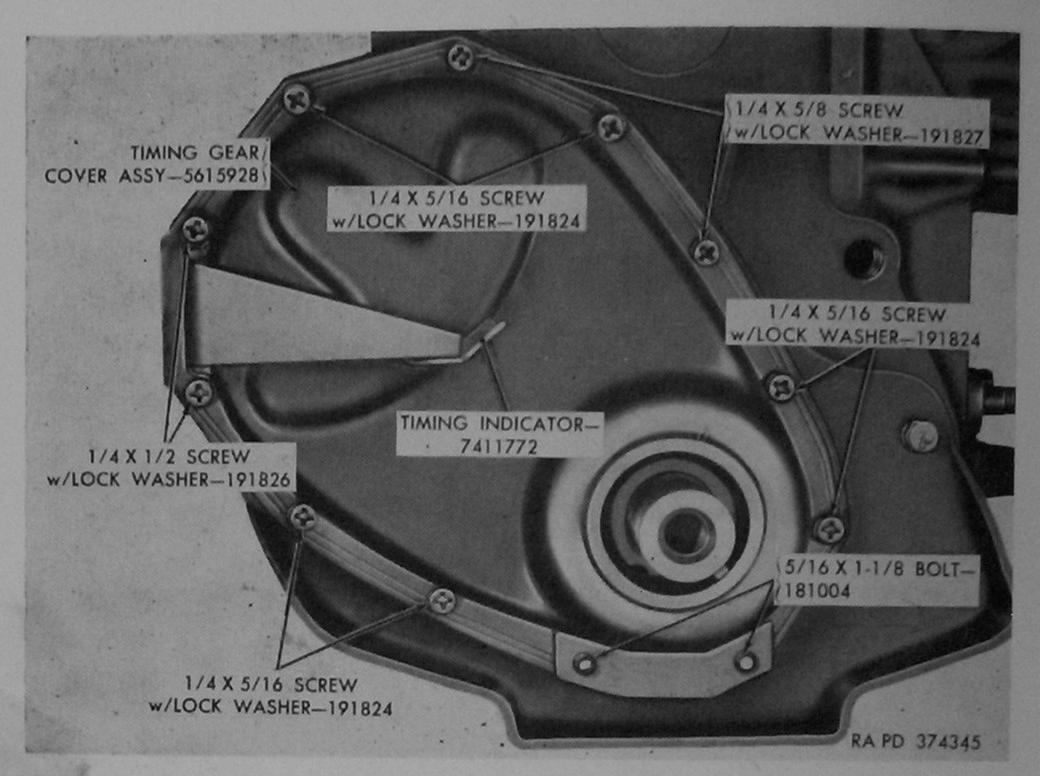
Timing gear cover and timing indicator installed—engine assemblies 7411599 and 8726920.
